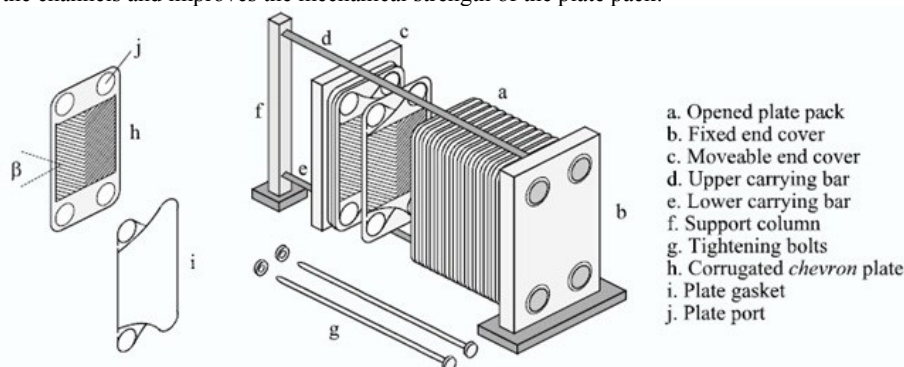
The Gasketed plate heat exchanger assemblage and parts
